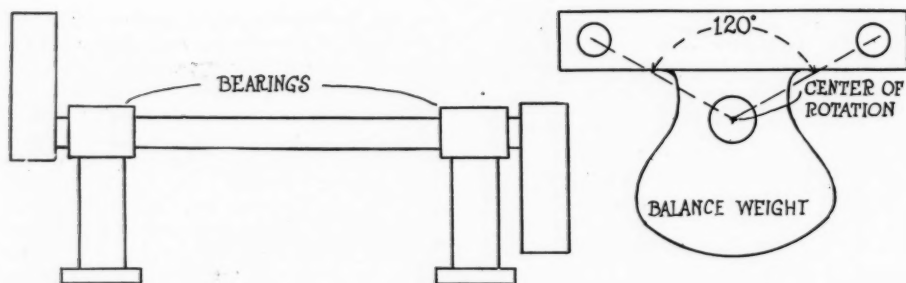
Shaft in static balance. Centrifugal force on one arm is equal and opposite to the other
